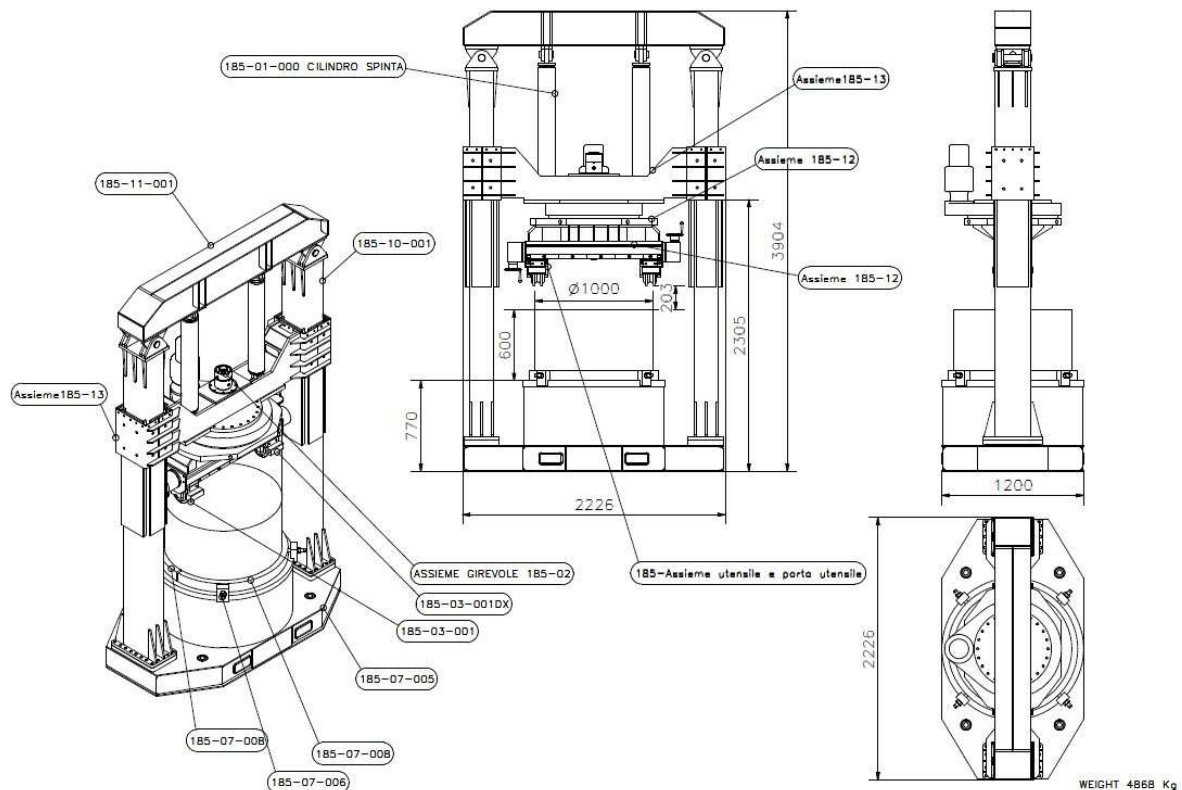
Technical drawing of the hydro-cutting demonstrator - main drawing
